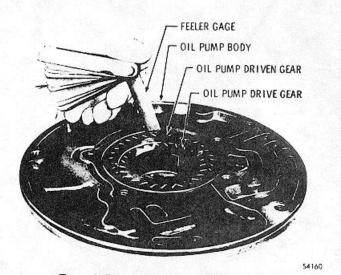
Checking diameter clearance of oil pump driven gear
